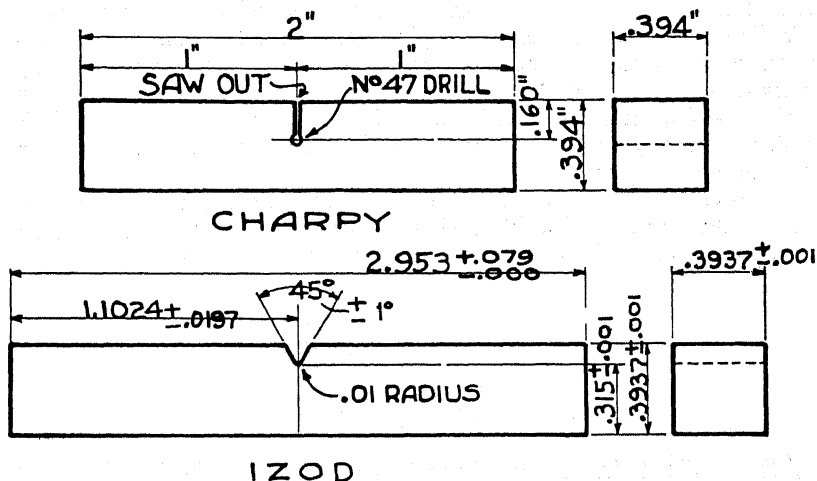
Diagram of specimen for notch-impact test of weld metal.
